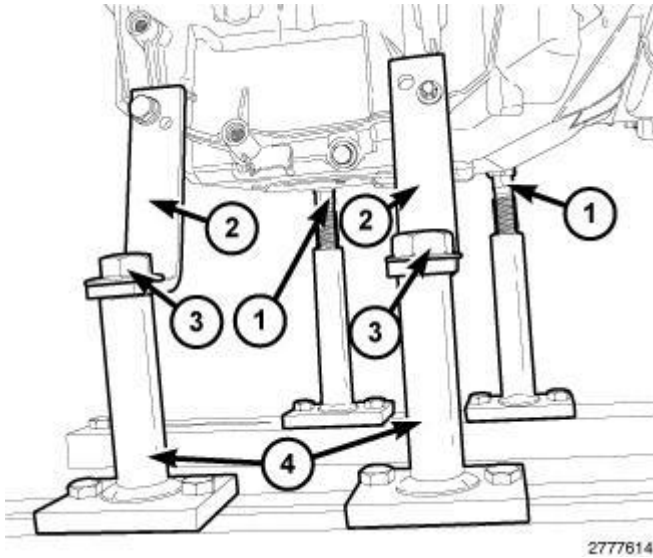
Engine Mount Through Bolt & Right Engine Mount Bolts
